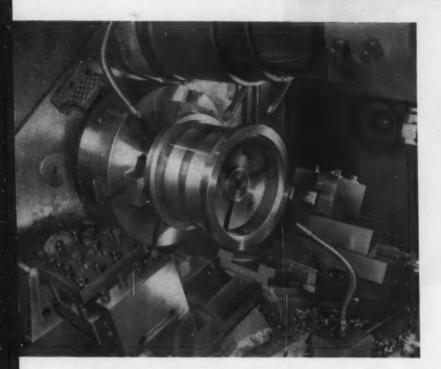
The expanding arbor supporting shell type bearings is actuated by the same air mechanism which operates the back-stop used with strip type bearings.
